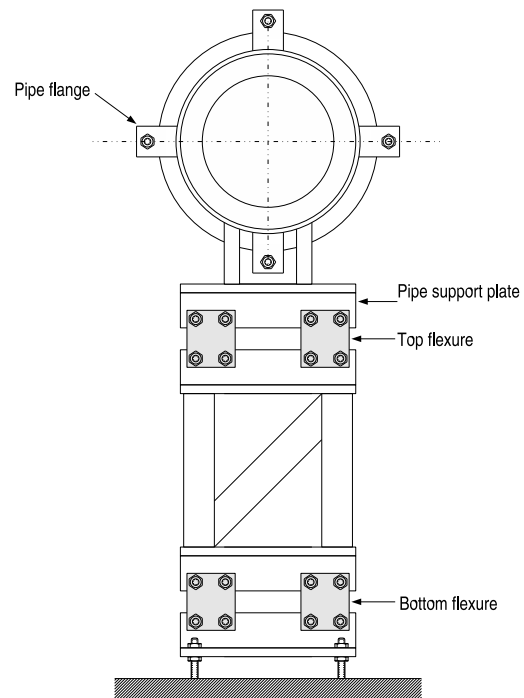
Schematic end view of the pipe supports, showing the flexures.
